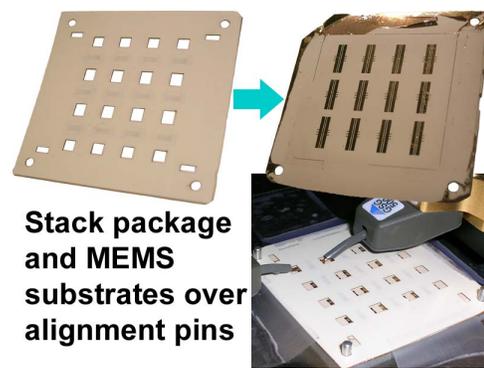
Top left: LCP superstrate packaging layer with holes for alignment and probe feed-throughs. The packaged cavities between each set of probing holes are visible due to LCP becoming partially transparent at a 2 mil thickness. Top right: CB-FGC transmission lines with air-bridge RF MEMS switches in the center of the transmission lines. Bottom right: Both layers stacked on alignment fixture and probed through the feed-through windows.
